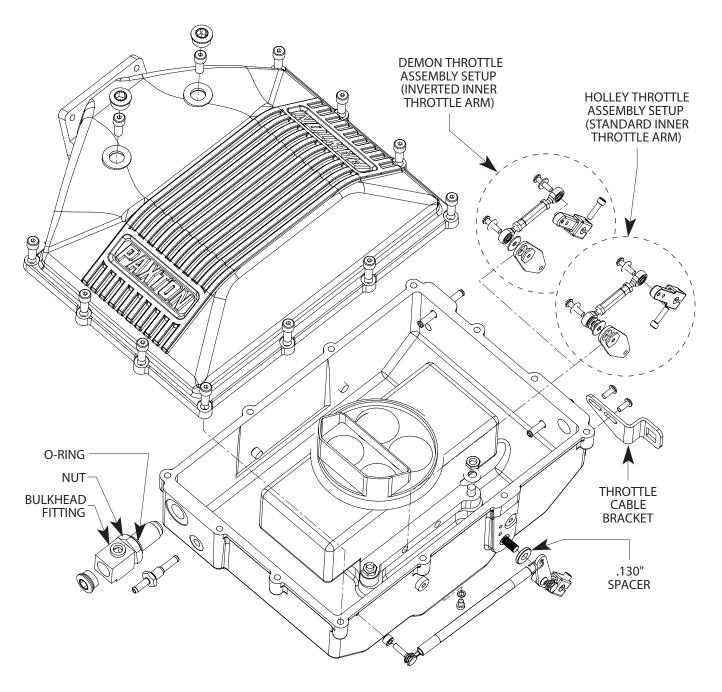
I / Carburetor enclosure (64-68 Mustang shown)
